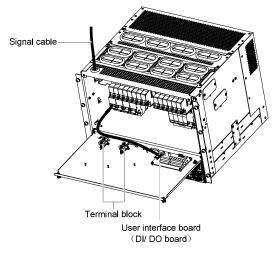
Netsure 731A91-S/S3 user interface board illustration
